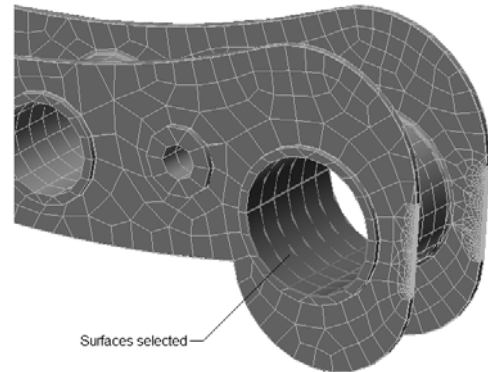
Surfaces that are completely enclosed inside the circle drawn are selected
